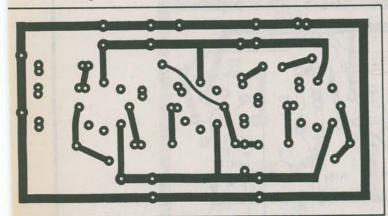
This is the exact-scale template for etching the filter board. Use a number 67 drill bit for all component-mounting holes.
